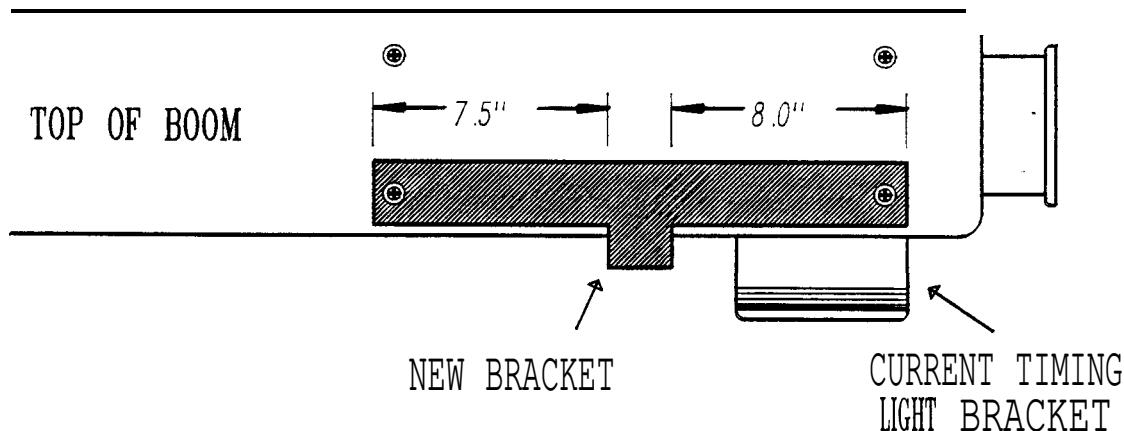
TIMING LIGHT BRACKET MOUNTING POSITION Printed in U.S.A.
